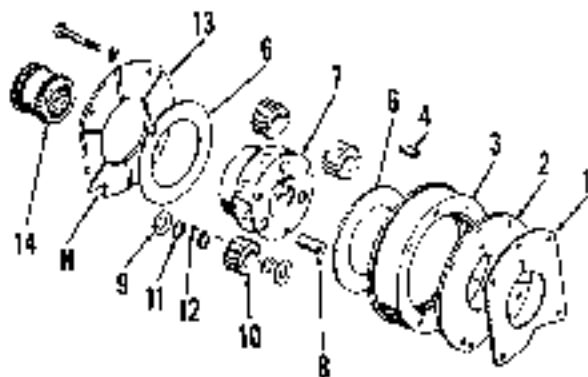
Exploded view of planetary assembly used on Multi-Power models. Notched section (H) of rear cover is installed over bottom right-hand mounting bolt hole.
